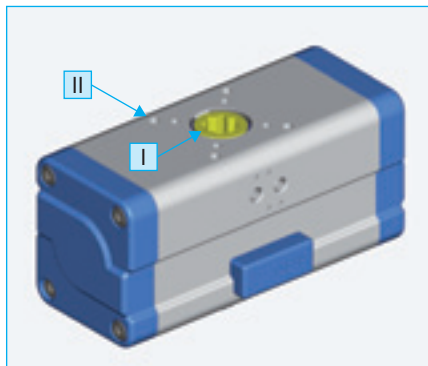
| Removal/Mounting of valves (view of actuator from below (valve interface))
